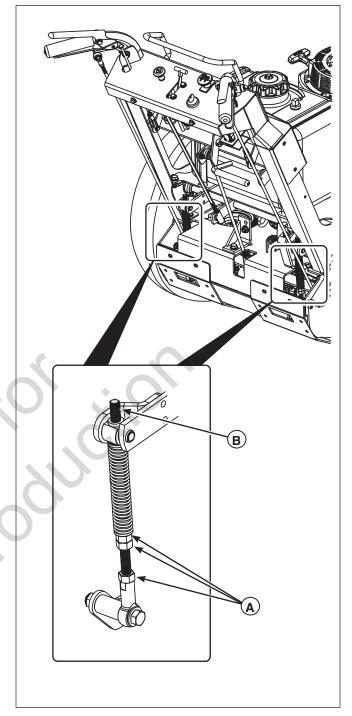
Adjusting the Speed of the Faster Wheel A. Nuts
